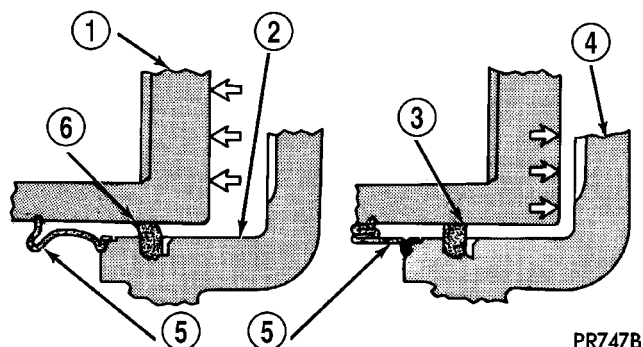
Caliper Piston Seal Function For Automatic Adjustment
